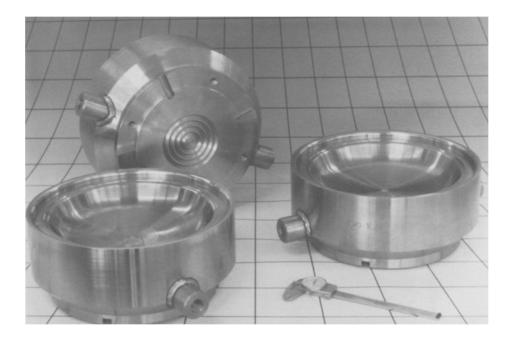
Mould for the production of a washing machine sight glass. Material: PM 2000.
